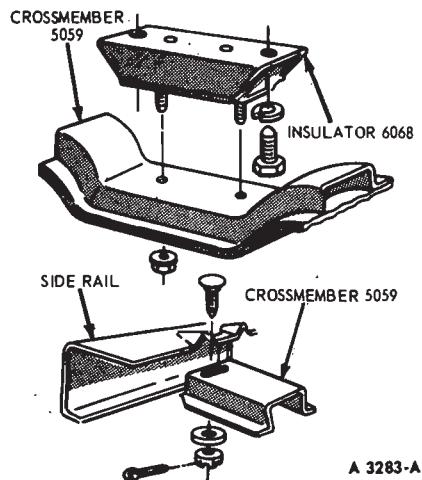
Engine Front Supports—Mustang and Cougar
